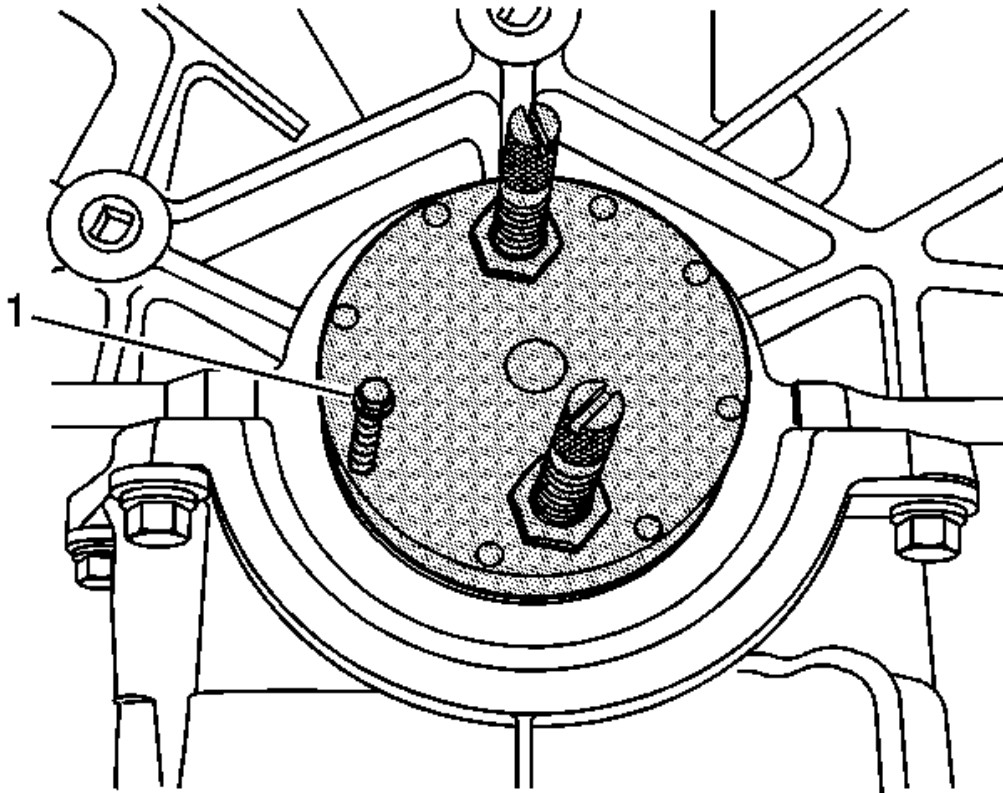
View Of 8 Installed EN-48672 #2 Self Drill Screws
